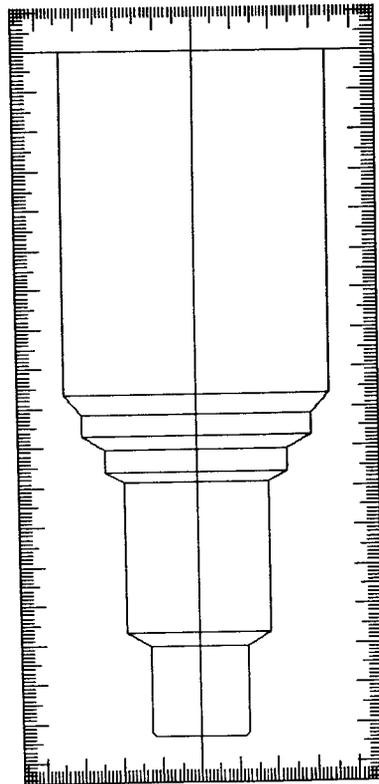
Stub Shaft Forging, WFM 2023 (machined part)
